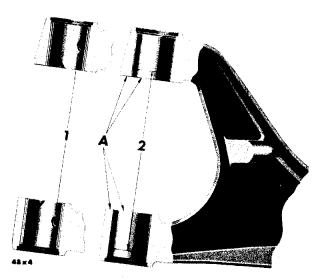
King Pin Bushings Installed (Elliott Type Axle) (B-4-EU, B-4-H, B-4-J, B-4-K, B-4-R)
